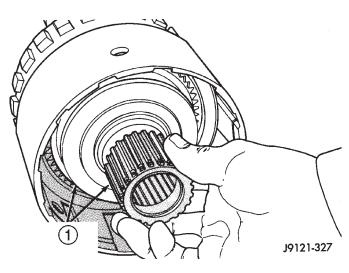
Sun Gear Installation 1 – SUN GEAR AND SPRING PLATE ASSEMBLY
